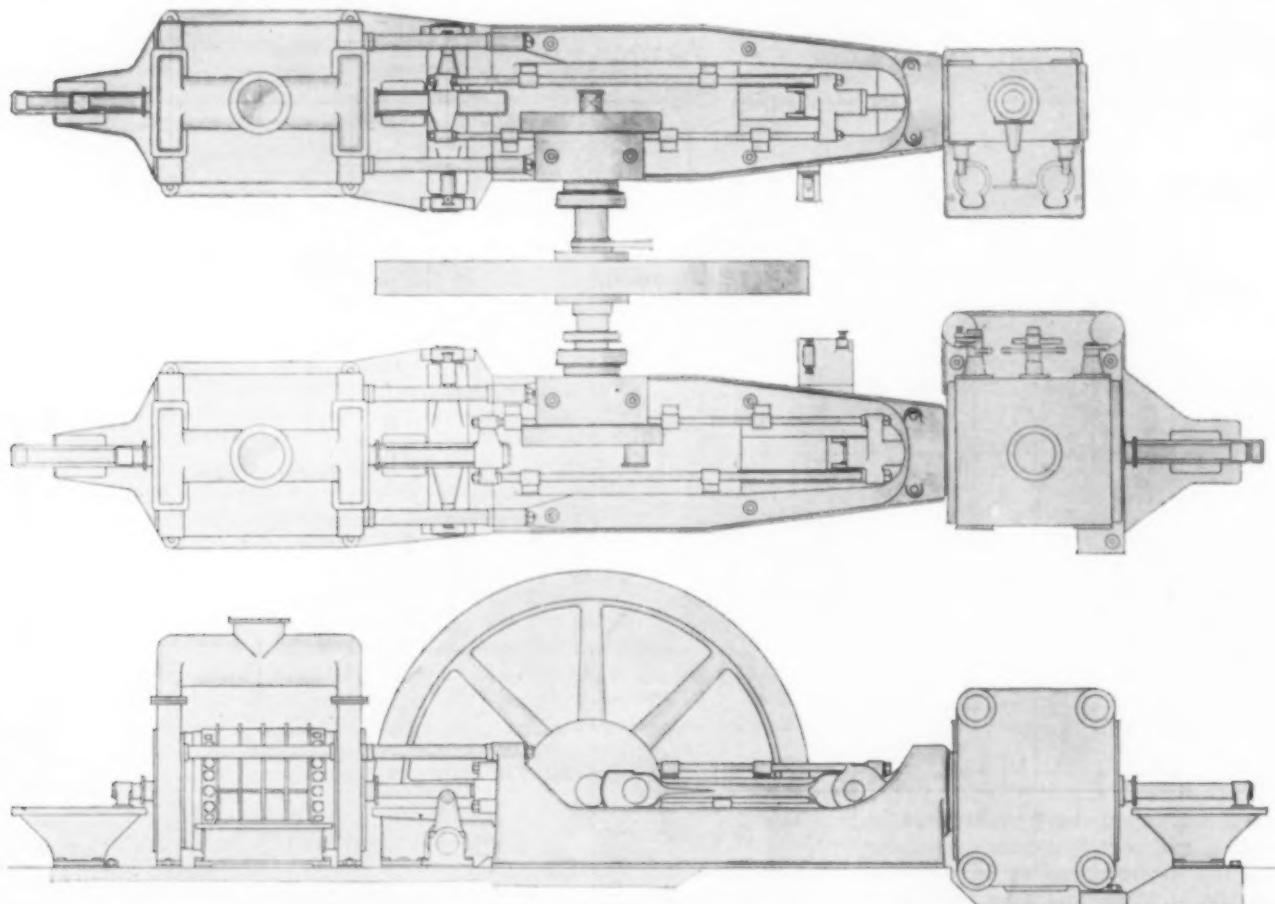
INSIDE-CRANK BLOWING ENGINE SLICK AIR CYLINDERS 36 IN. AND 72 IN. X 54 IN. STEAM, 72 IN. AND 72 IN. X 54 IN. AIR. ALLIS-CHALMERS COMPANY
